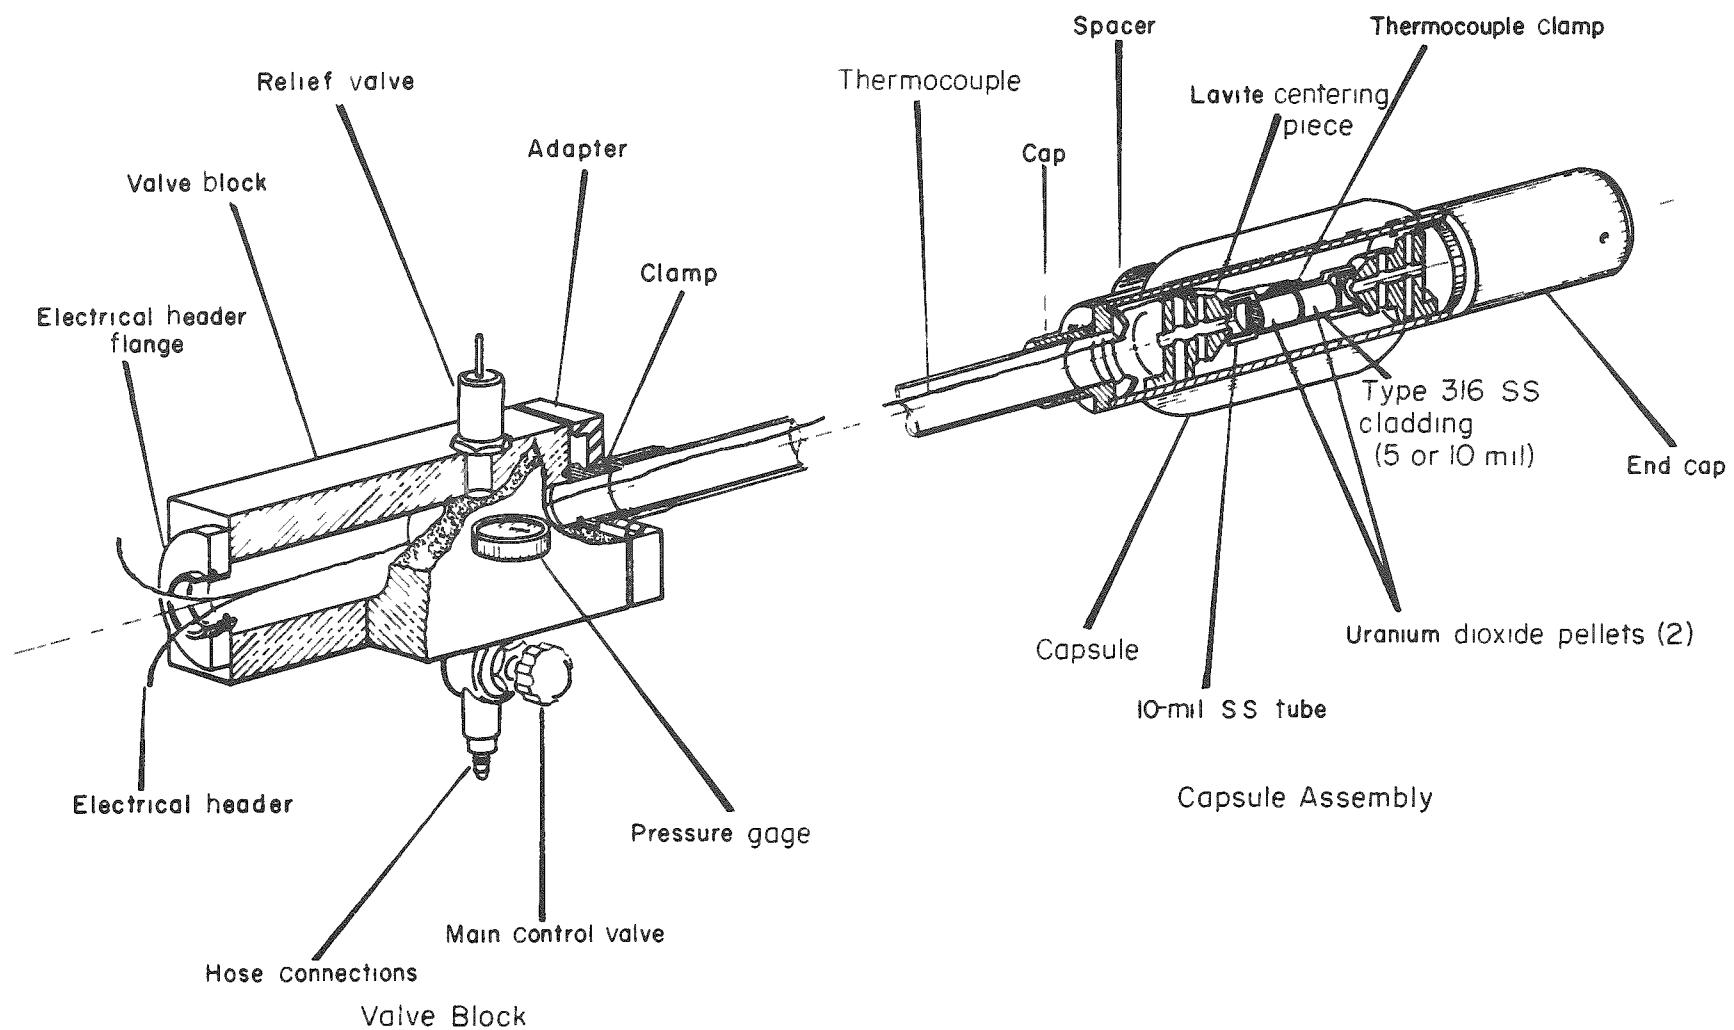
CROSS SECTION CAPSULE ASSEMBLY AND VALVE BLOCK
